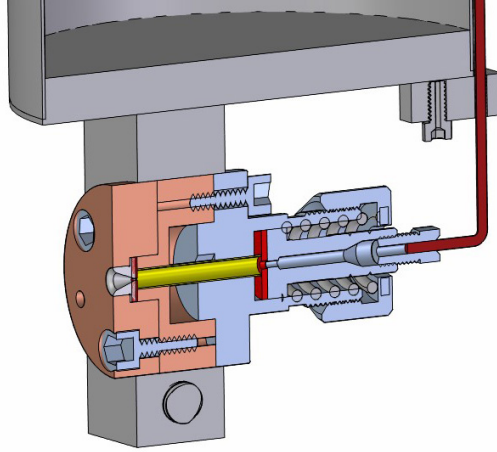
The Even-Lavie cryogenic supersonic valve. A cross-sectional view is taken to give a better view. The nozzle assembly is attached to a cryostat and is cooled. The mechanism for the valve (plunger and spring) is enclosed in the yellow tube and sealed with two kapton washers in red. The assembly is held by a large spring in the back of the nozzle. Gas is supplied to the nozzle by a 1/16" stainless steel tube shown here in red at the back of the assembly.
